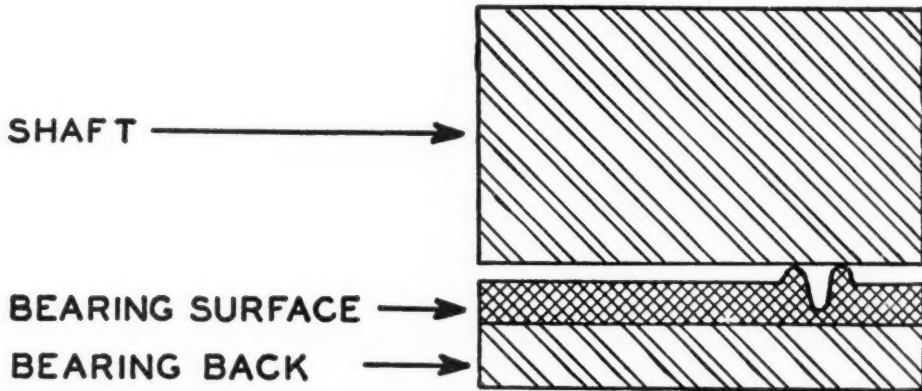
Showing on an exaggerated scale how a particle of foreign matter thicker than the oil film can scratch or score the bearing surface.
